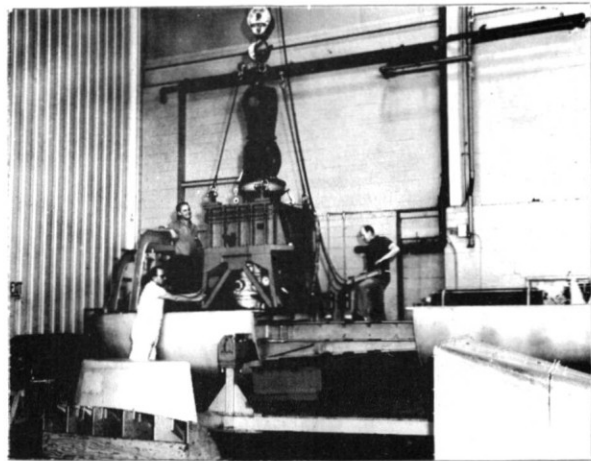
ROTOR HUB AND TRANSMISSION ON TEST MODULE.
